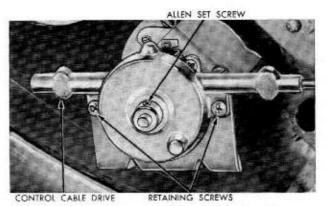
Dial-Temp Control Shaft and Cable Drive-1958-(E-2627)
